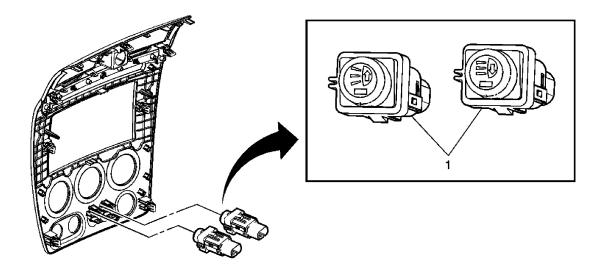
Ambient Light Sensor Replacement Courtesy of GENERAL MOTORS CORP.
